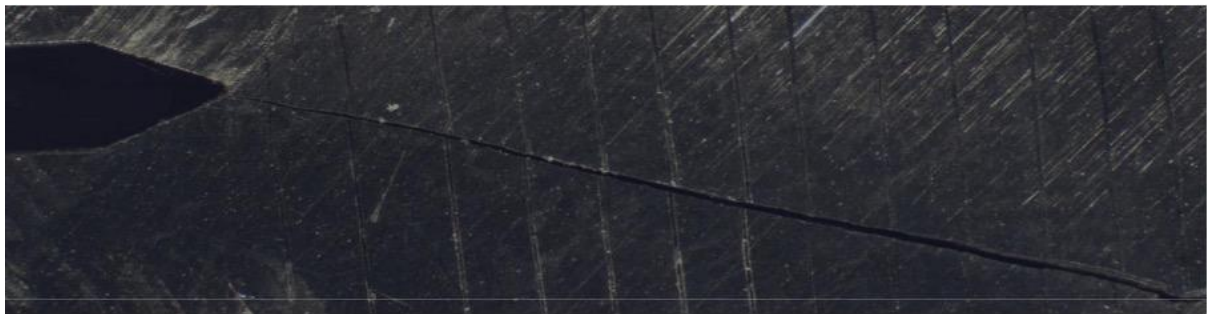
Fatigue crack for 6.5 m/s specimen 2
